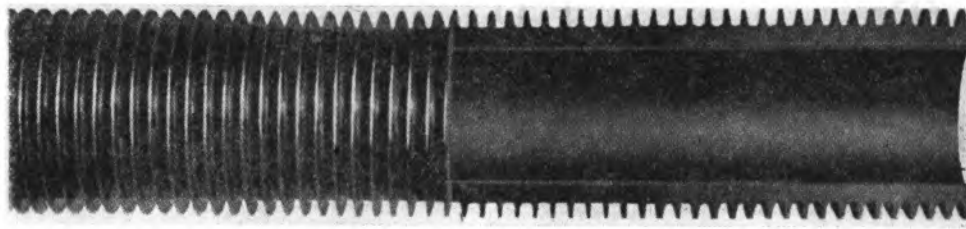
SECTION OF TUBE USED IN EXPERIMENTS
